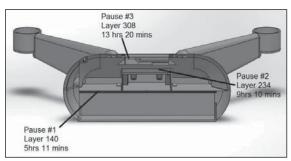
Cutaway drawing showing placement position and pause times for adapter installation
